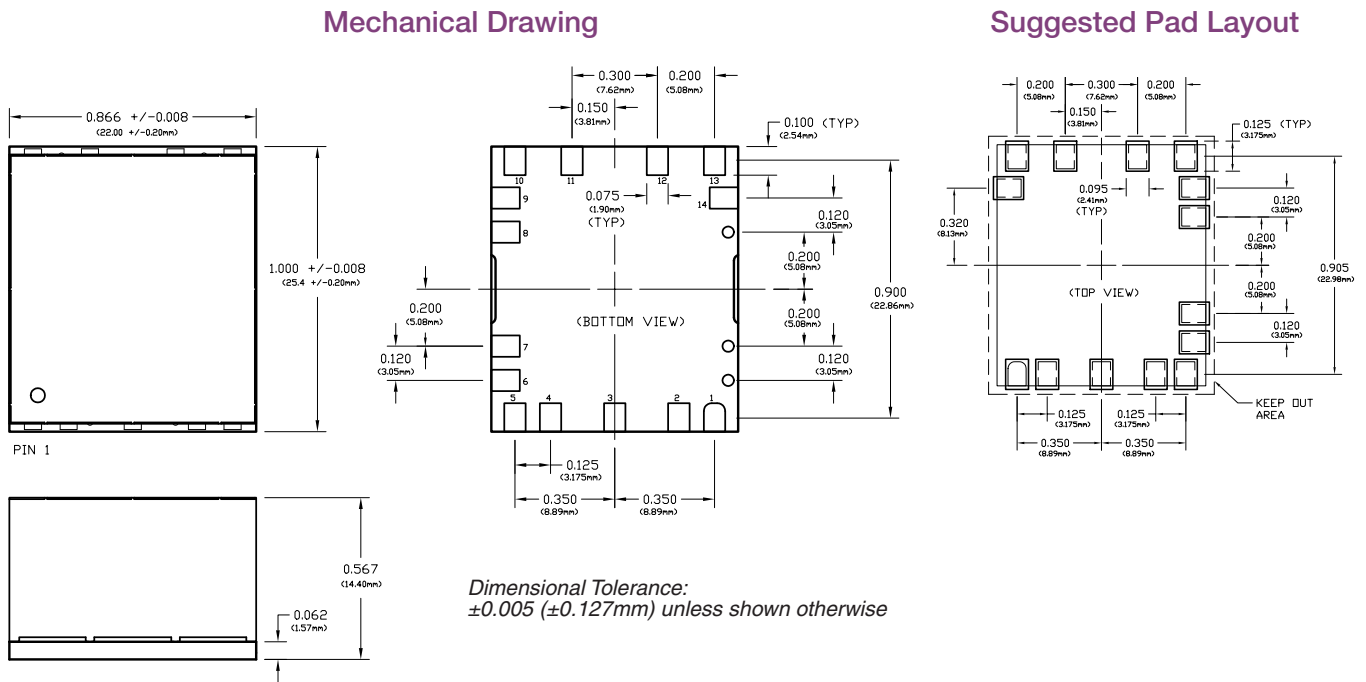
EH320-TFC-CC Mechanical Drawing and Suggested Pad Layout
